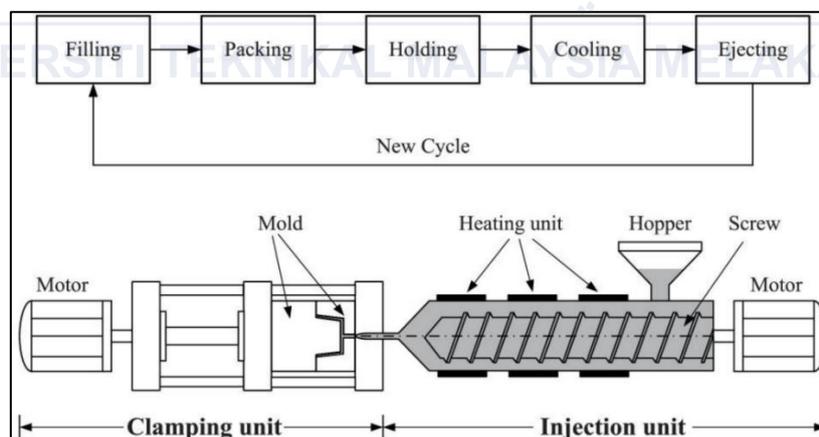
Standard injection moulding machine (Zhao et. al, (2022))
